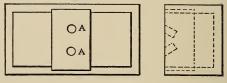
Thumb Holes for Drawing a Loose Piece in Core Box.
